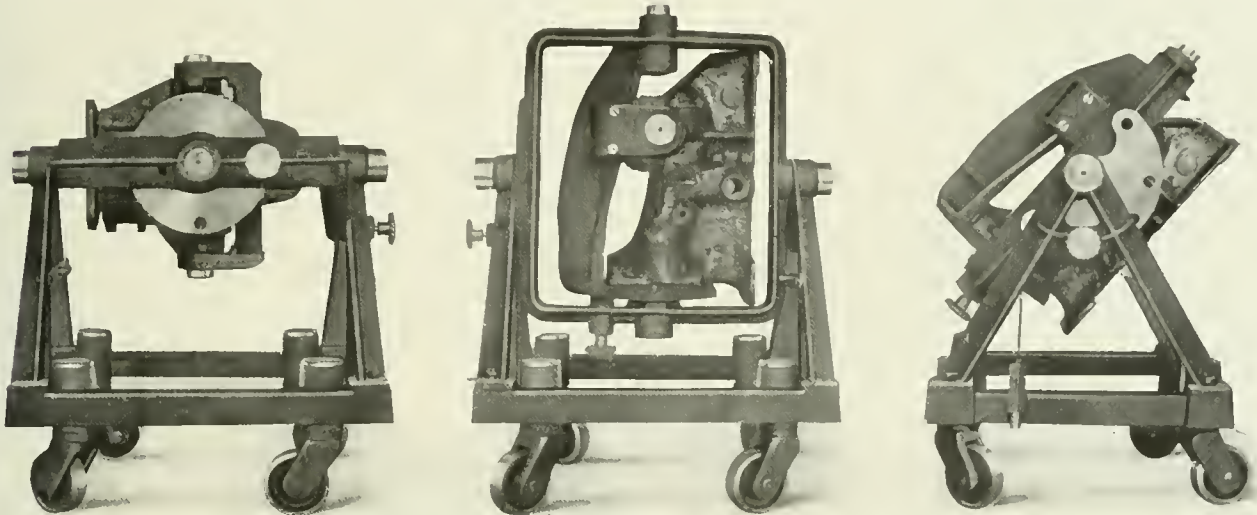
Jig with Universal Adjustment, built by the Rockford Drilling Machine Co.
